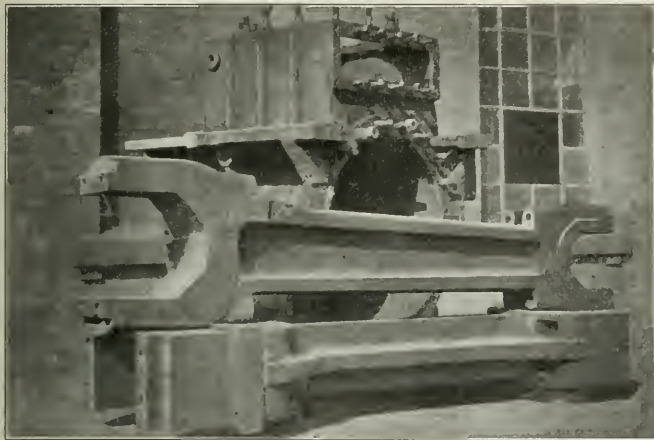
CONNECTING RODS OF LARGE STATIONARY ENGINE AND CYLINDER WELDED ELECTRICALLY.
